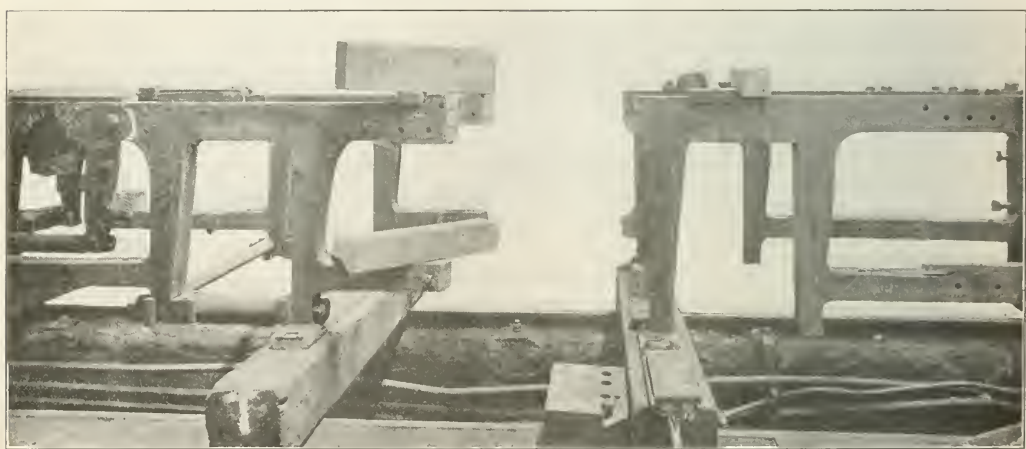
The Frames Ready for Welding in the Additional Material Between the Second and Third Drivers
